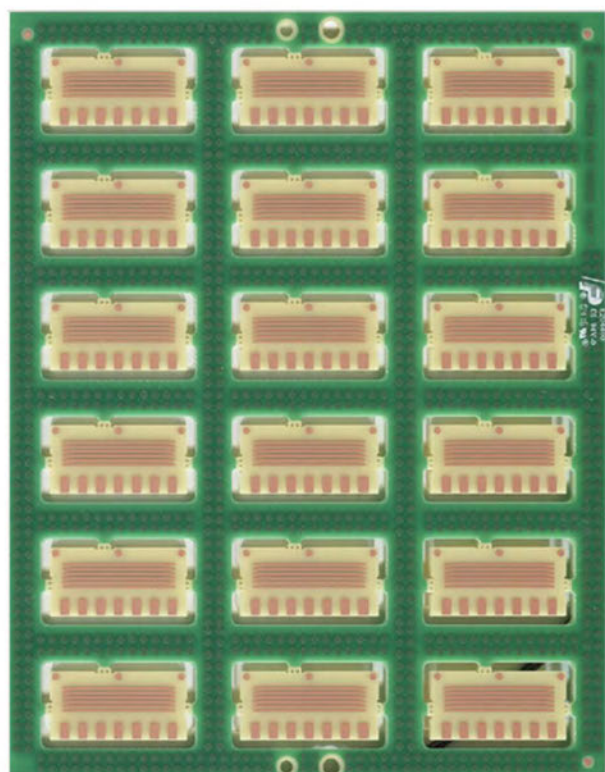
Test board for solderability evaluation. 18 test coupons for solder spot and wetting balance measurements. Six rows of tracks for spot patterning of 22 paste dots and seven pads for wetting balance measurement.
